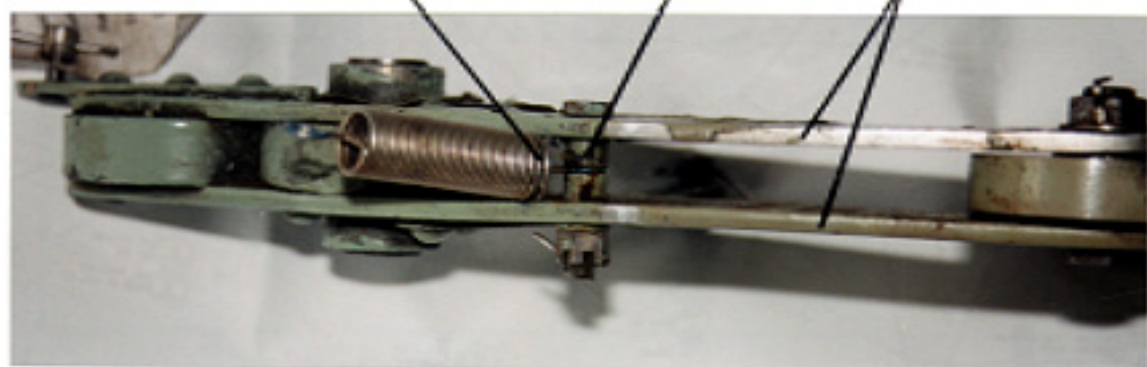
ELEVATOR GUST LOCK ROLLER LEVER
